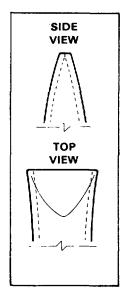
Approximate Shape of Lacing Ends 4. When forming lacing ends with a hammer, the lacing will have a tendency to move backward. A holding device similar to the ones shown in Figure 14-16 should be used to hold the lacing in place. This will make it easier to obtain the desired shape of the lacing end. Be sure that both ends of the lacing are flattened in the same plane (not twisted).
